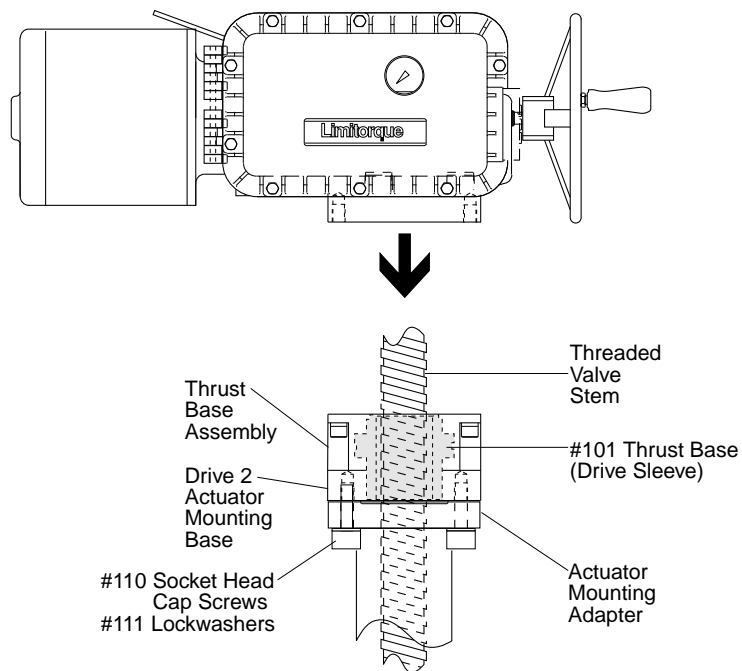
L120-85 Thrust Base assembly orientation (Drive 2)
